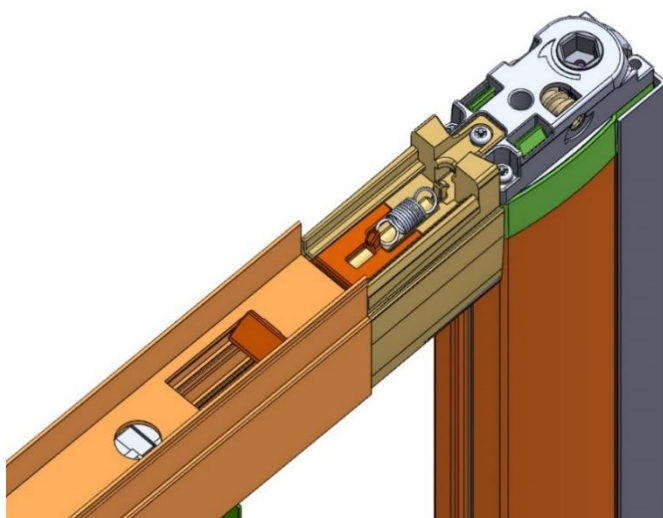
Final assembly of upper guide connected to the head-box through the telescopic cap.
